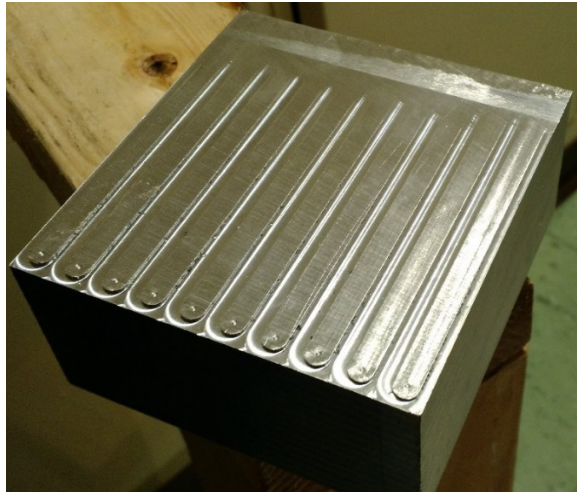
Stock used to mill testing struts in CNC machine. Here, struts have already been cut off from stock
